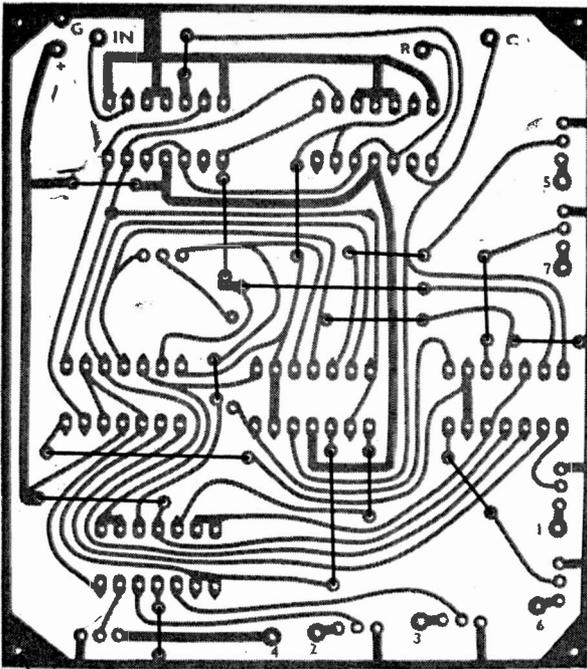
Other than the four corner holes (for mounting), use a #64 drill for all holes. Wire the required 16 jumpers on the component side of the PC board.
